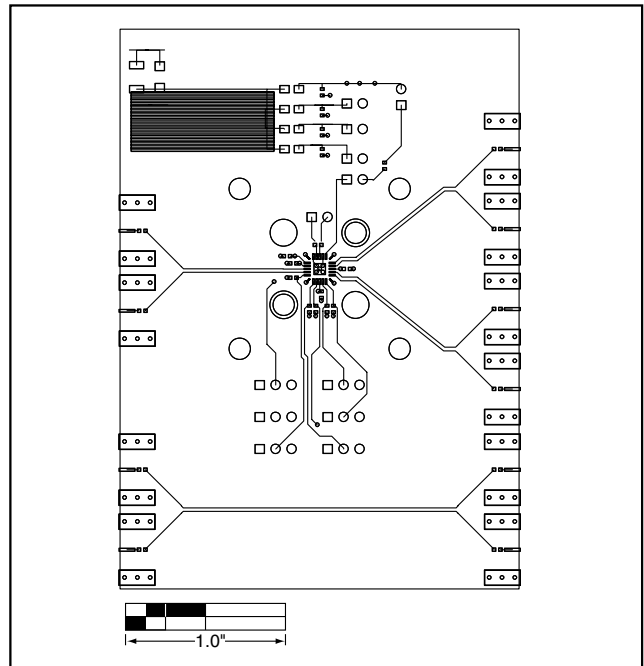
MAX3873A EV Kit PC Board Layout—Component Side
